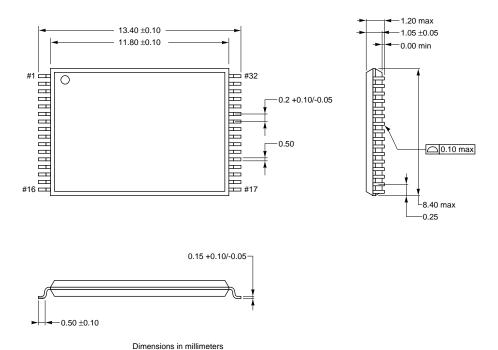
32-Pin sTSOP (Type I) 8 x13.4 Forward Package Dimensions
